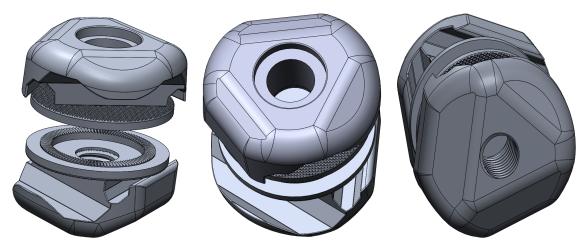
Sixth clamp concept, disc spring option; a) Isometric view, b) Top view, c) Bottom view
